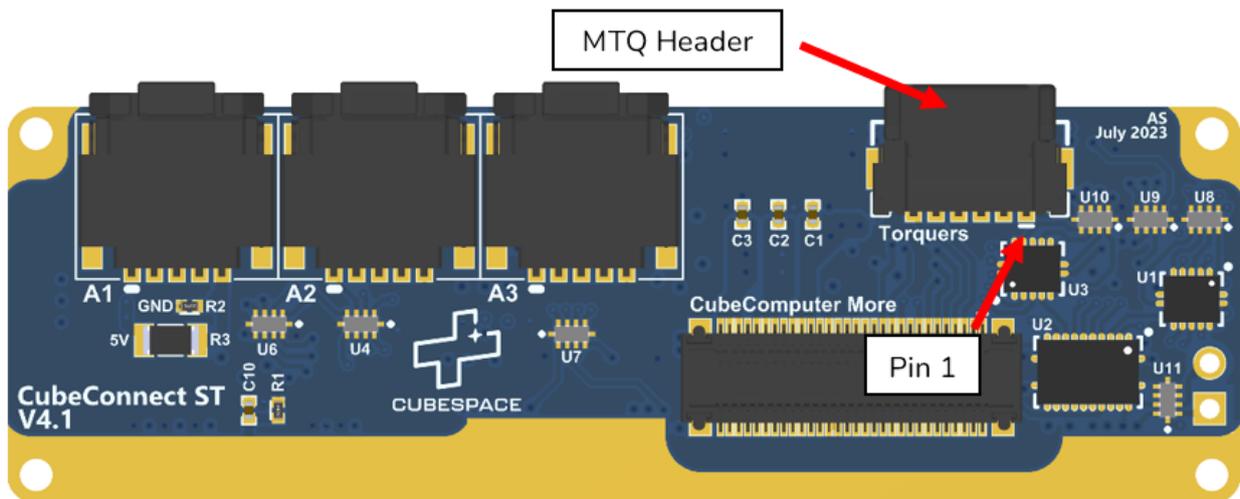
CubeConnect PCB, PC104 Variants (Back View) - Magnetorquer Header
